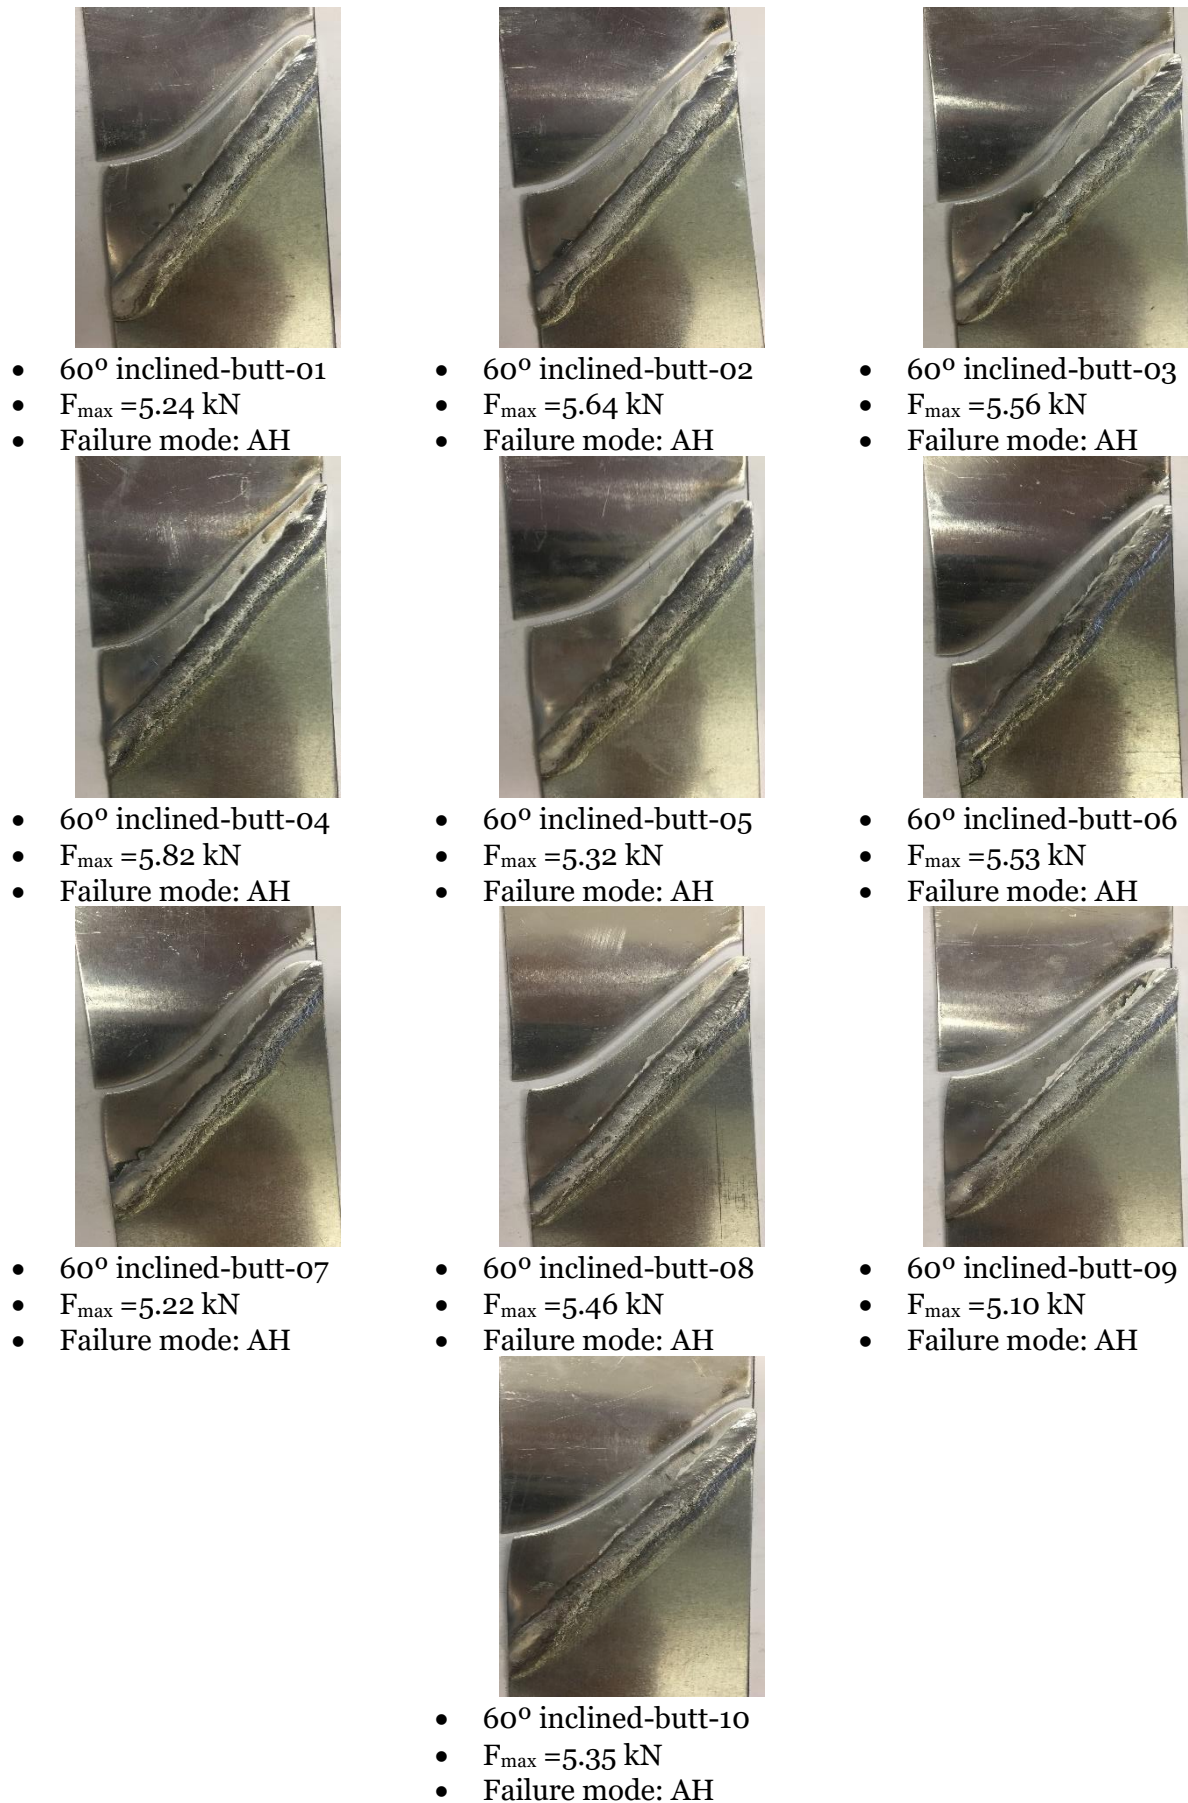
Tensile static failure of 60° inclined butt-welded joints (short-term).
